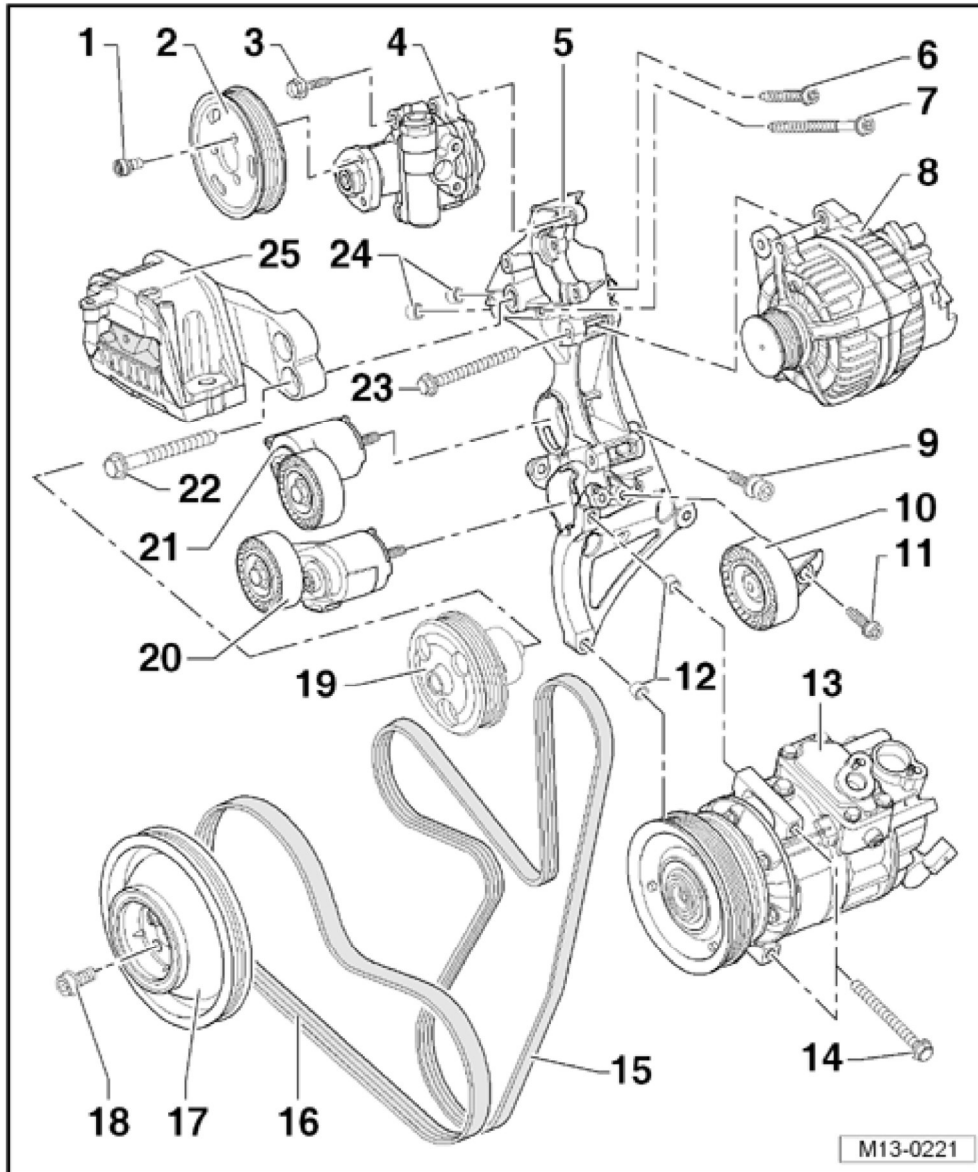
Attachments, Assembly Overview (Part I - Ribbed Belt)
